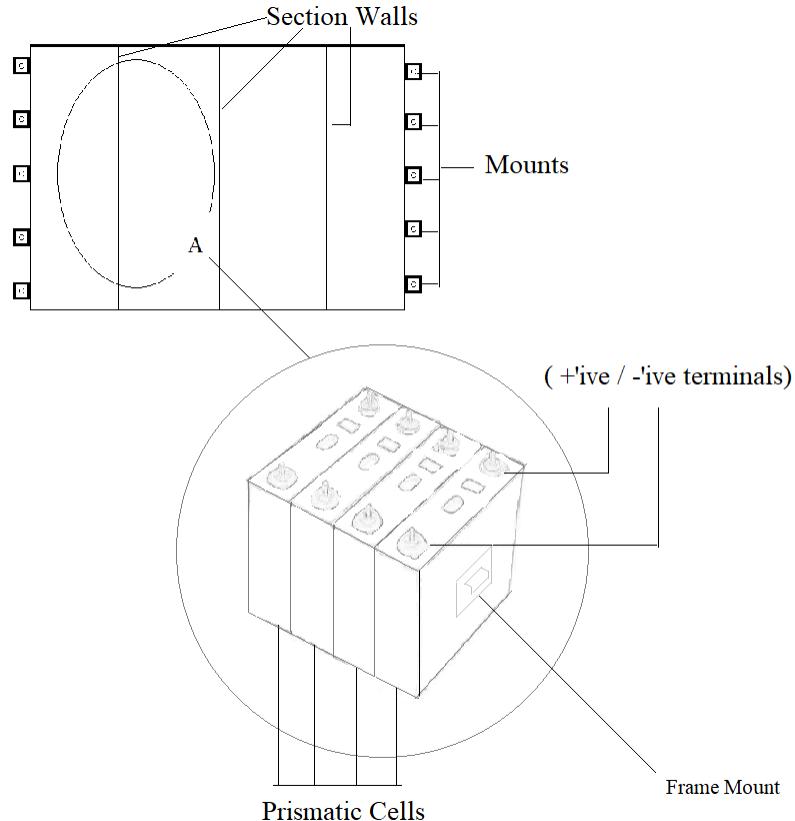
Top View of a Battery case with detail views for sections made up of prismatic cells [20]
